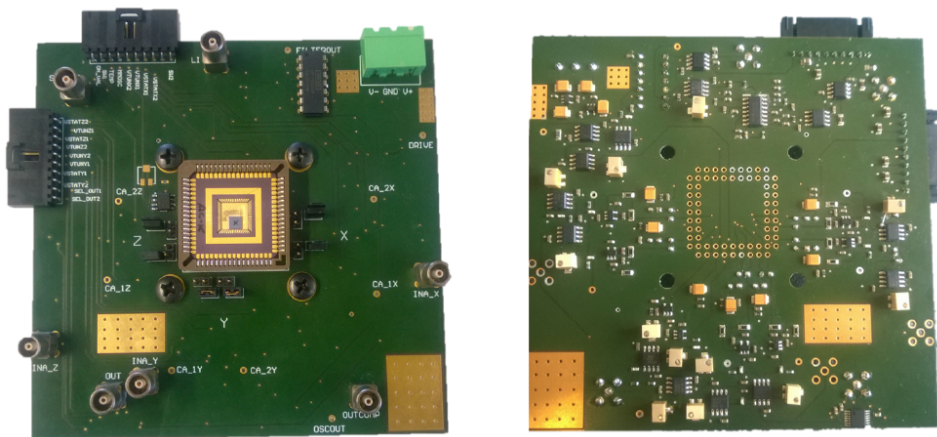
Up and bottom view of the 4-layer fabricated PCB.
